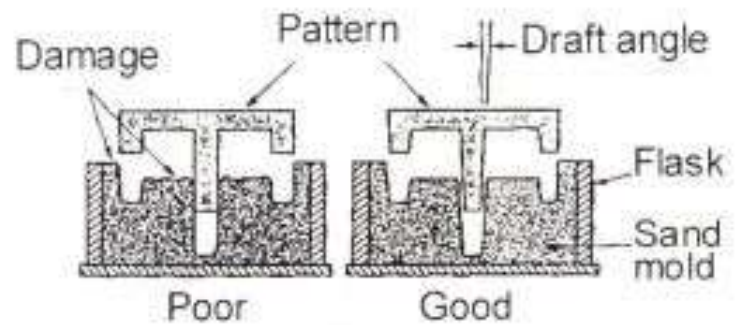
Taper on patterns for ease of removal from the sand mold
